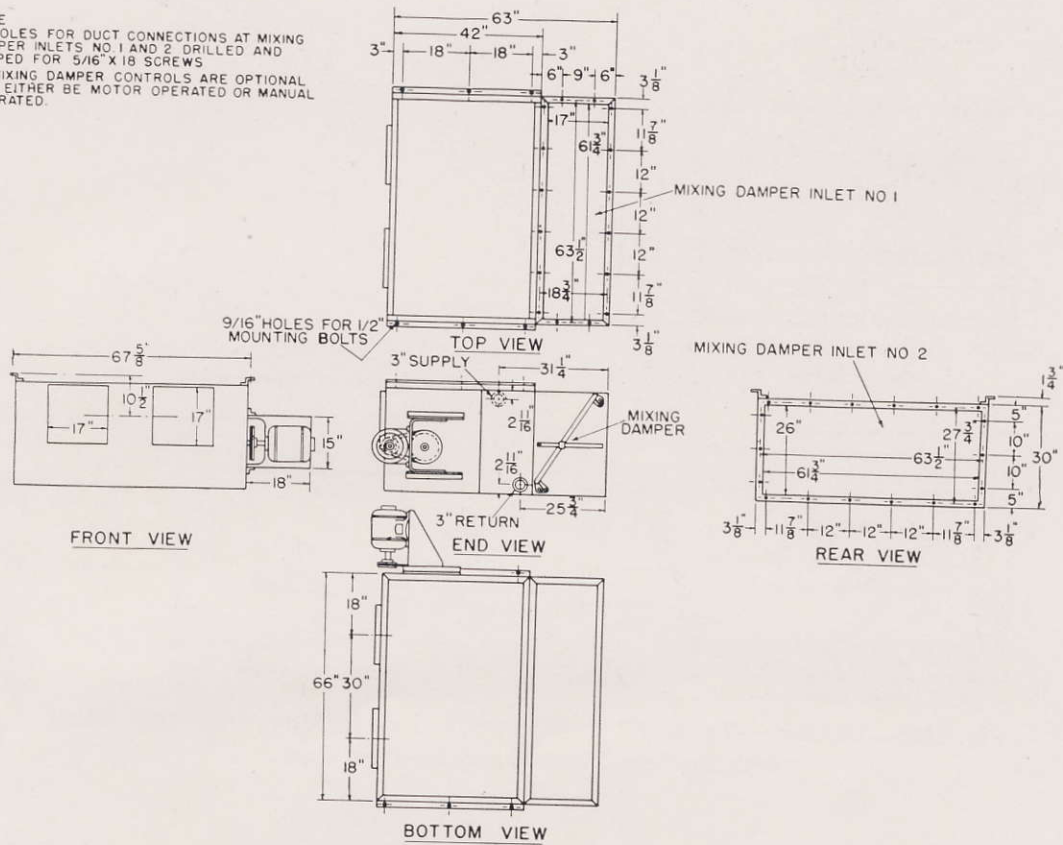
No. 3066 Type "R" Unit Heater. Ceiling Mounting, Mixing Damper.
